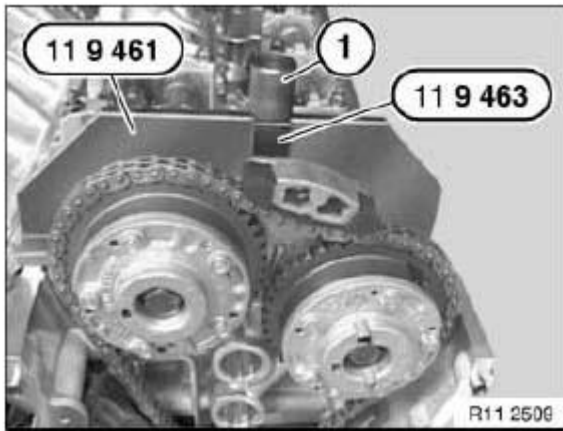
Identifying Special Tool (11 9 461) And (11 9 463)
